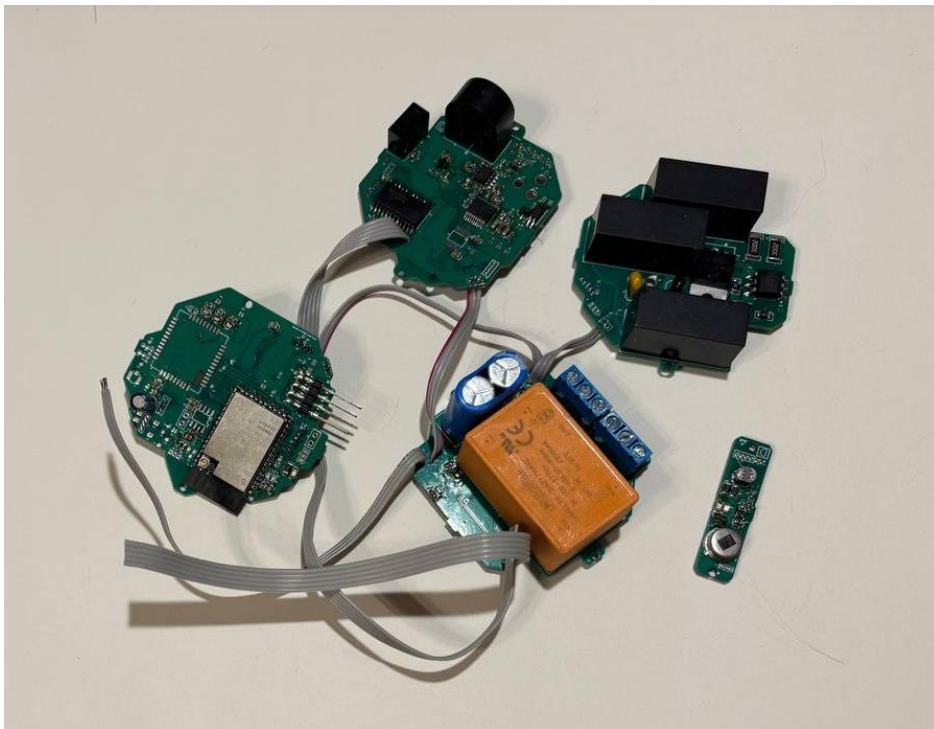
Image of a SEIS during the assembly process, before being assembled in single unit. Top side.
